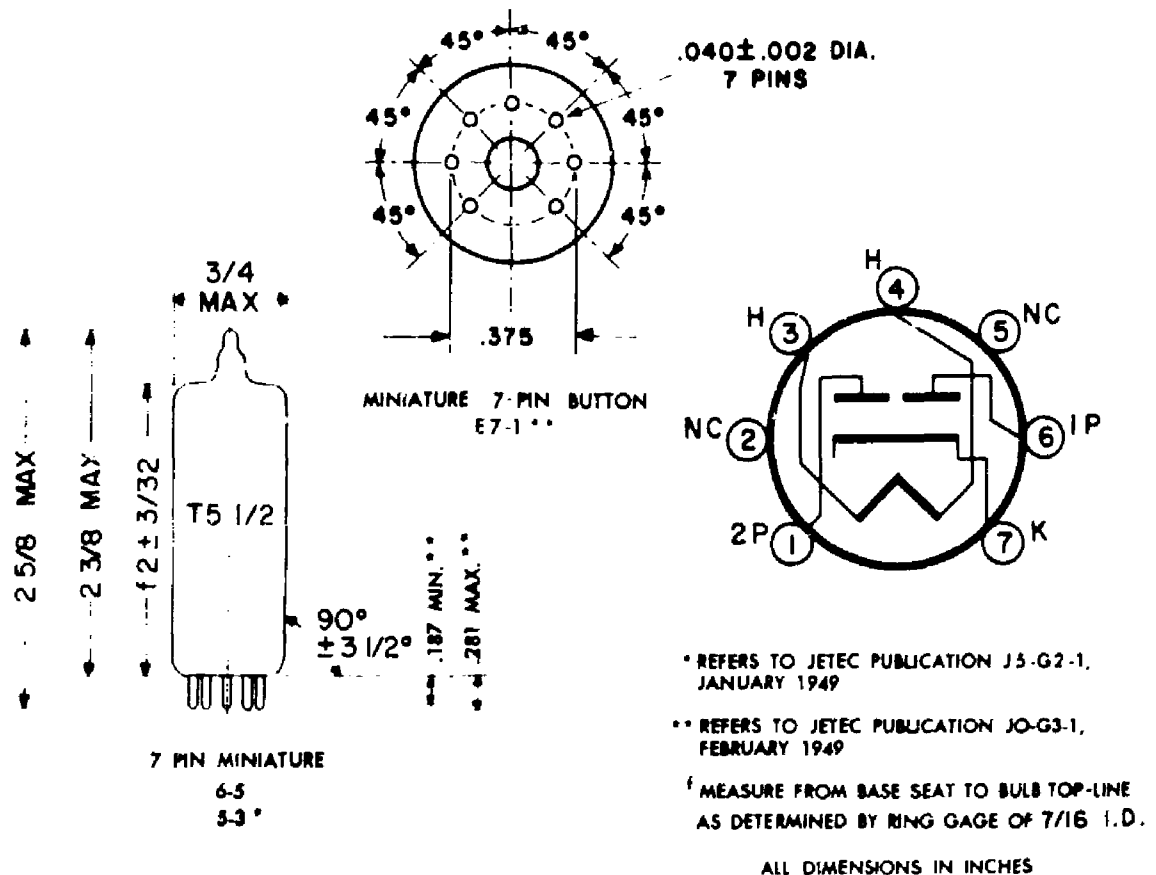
Outline Drawing and Base Diagram of Tube Type JAN-6X4W
